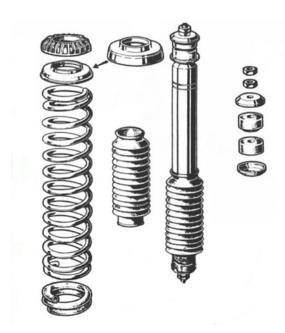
Coil spring / spring rest / shock absorber / elastomer bushings
